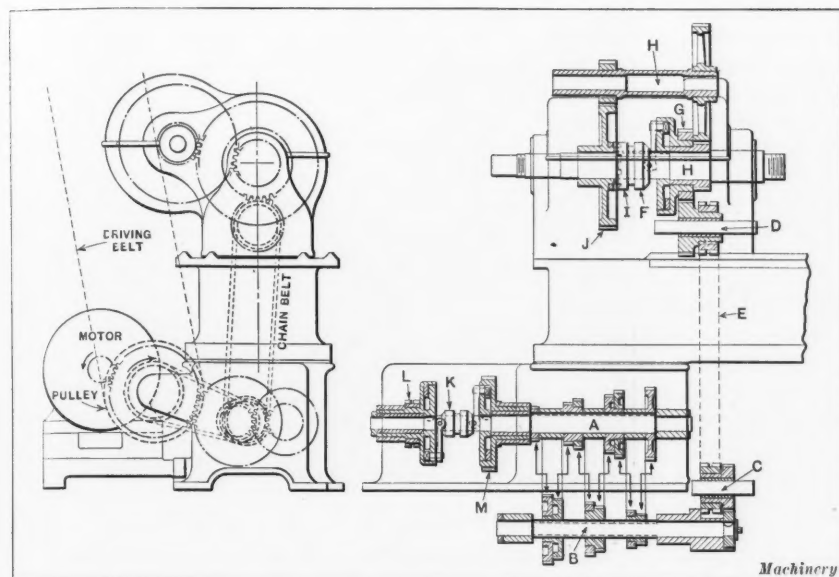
Arrangement of Driving Mechanism on the Bradford Geared-head Lathes
